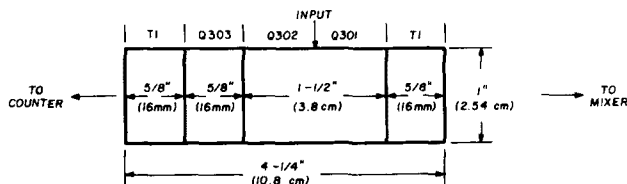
Layout of the oscillator-buffer assembly. Unit is 1 inch (25mm) high.
